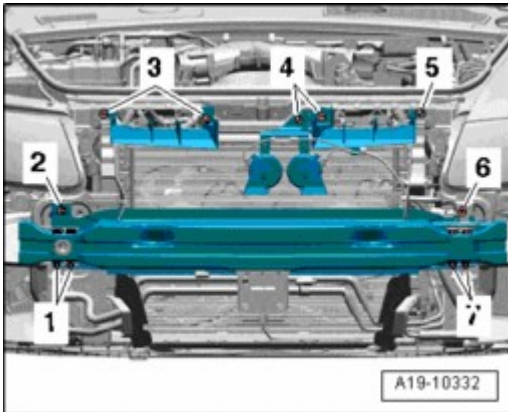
Identifying Bolts, Headlamp Bracket, Bumper, Nuts & Air Ducts
